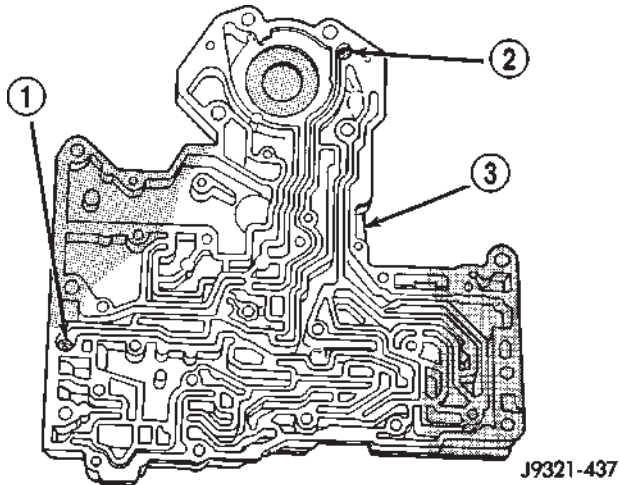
Rear Clutch And Rear Servo Check Ball Locations
